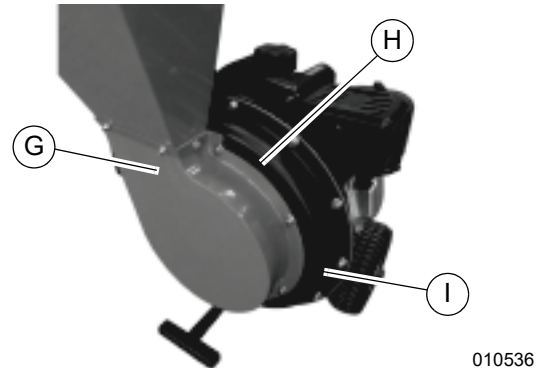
Positioning Hammermill Housing/Shredder Hopper Assembly on Flywheel Housing
